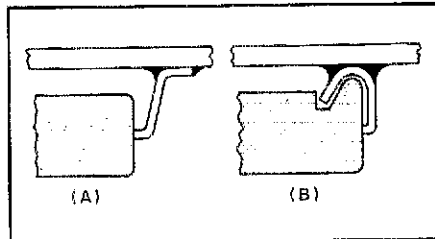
SMD lead variations. Gull-wing leads (A) are inspected easily; they can be accessed with test probes. The J-shaped counterparts (B) have a smaller PC-board footprint and are handled easily by automatic feeding machines.
